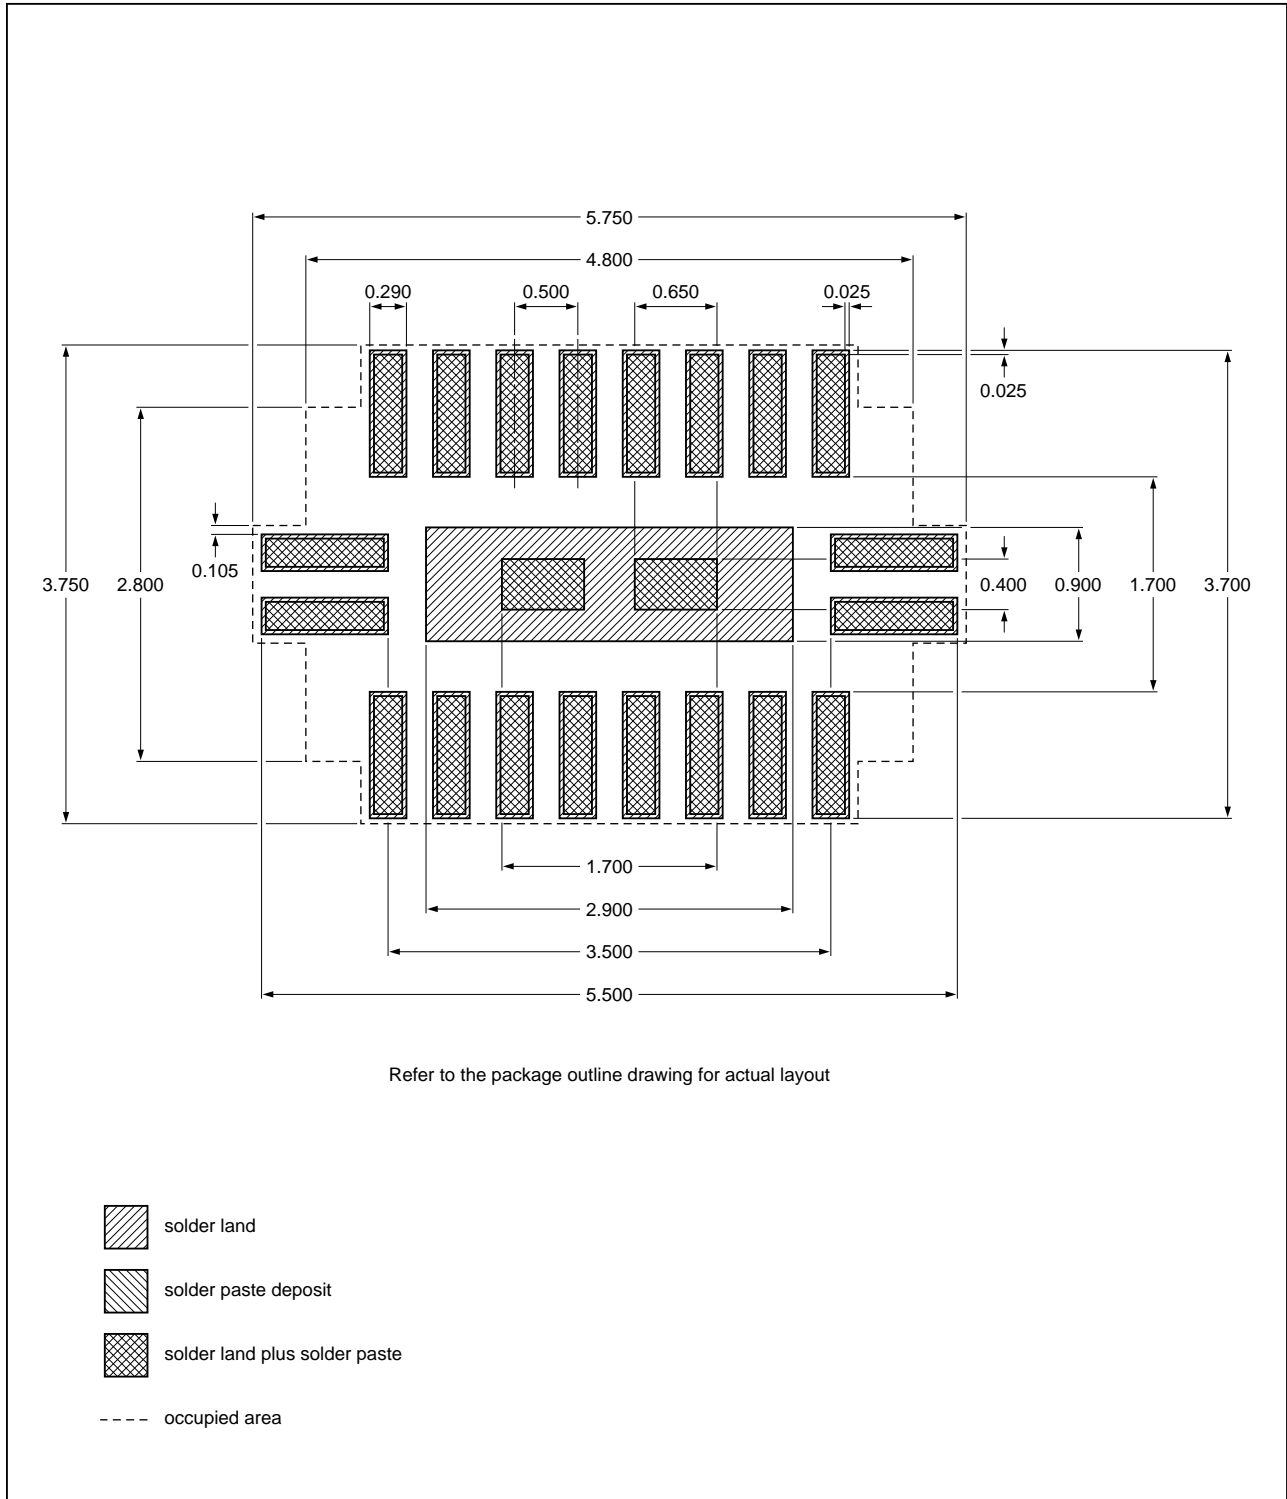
PCB footprint for SOT764-1 (DHVQFN20); reflow soldering
